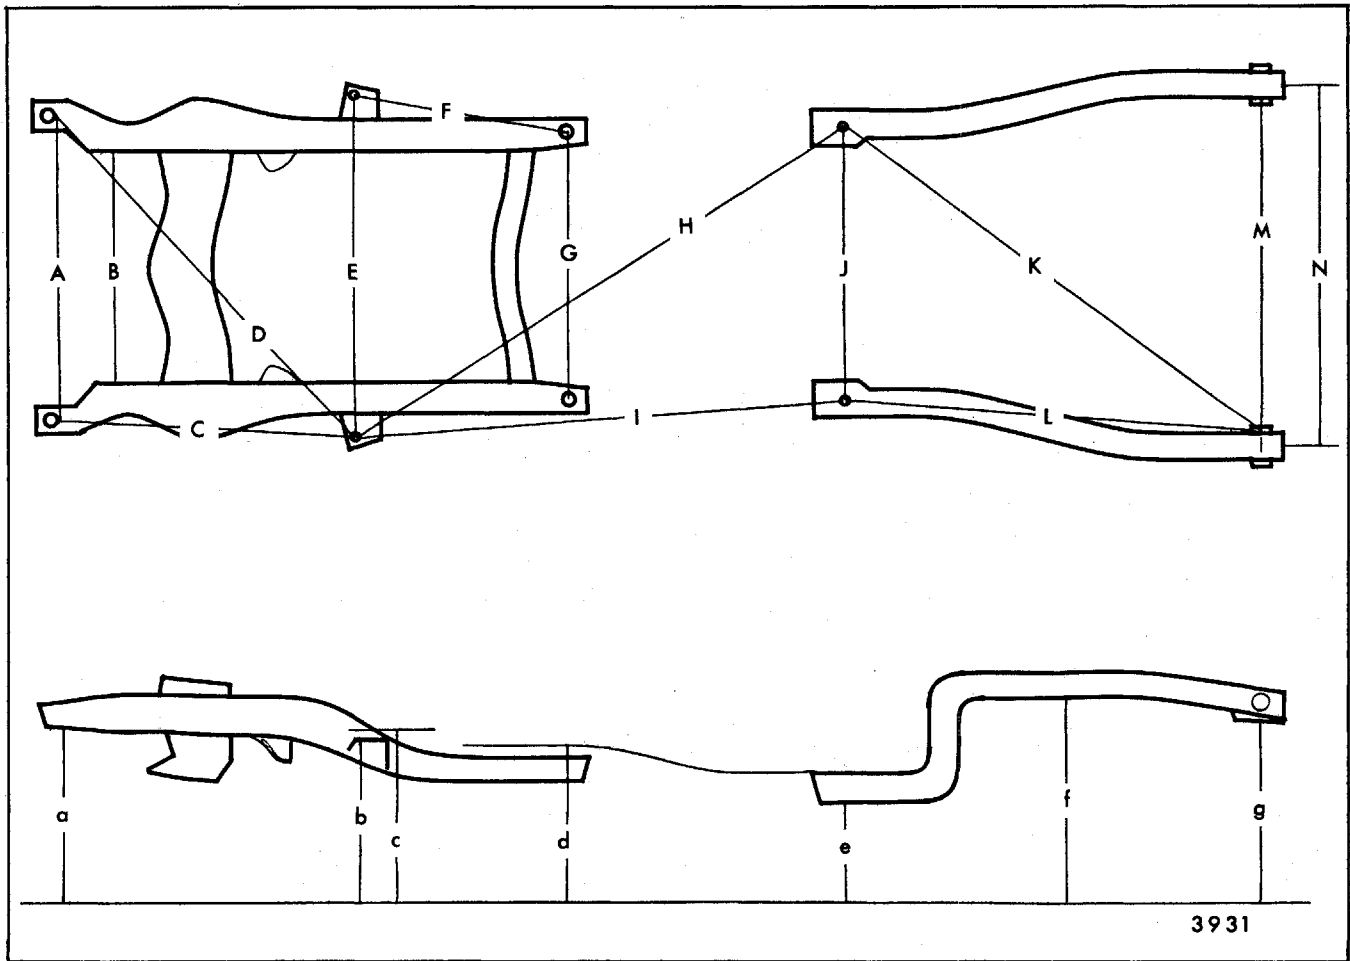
Horizontal and Vertical Checking Dimensions - "F" Bodies
